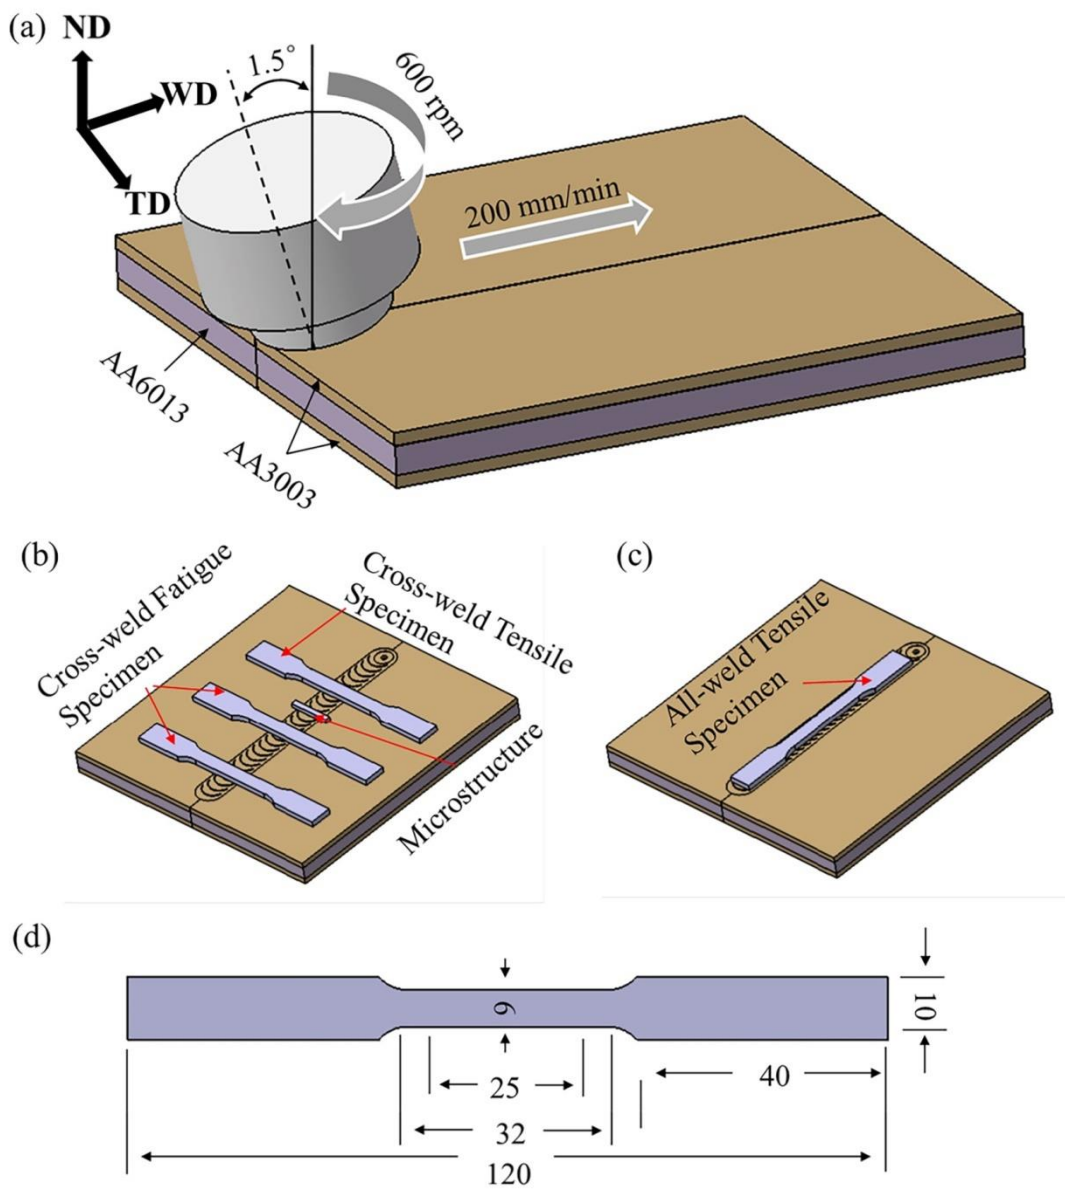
(a) The schematic of friction stir welding, (b) extraction of cross-weld sample, (c) extraction of all-weld tensile sample from the weld, (d) dimensions of all-weld, cross-weld, and BM samples
